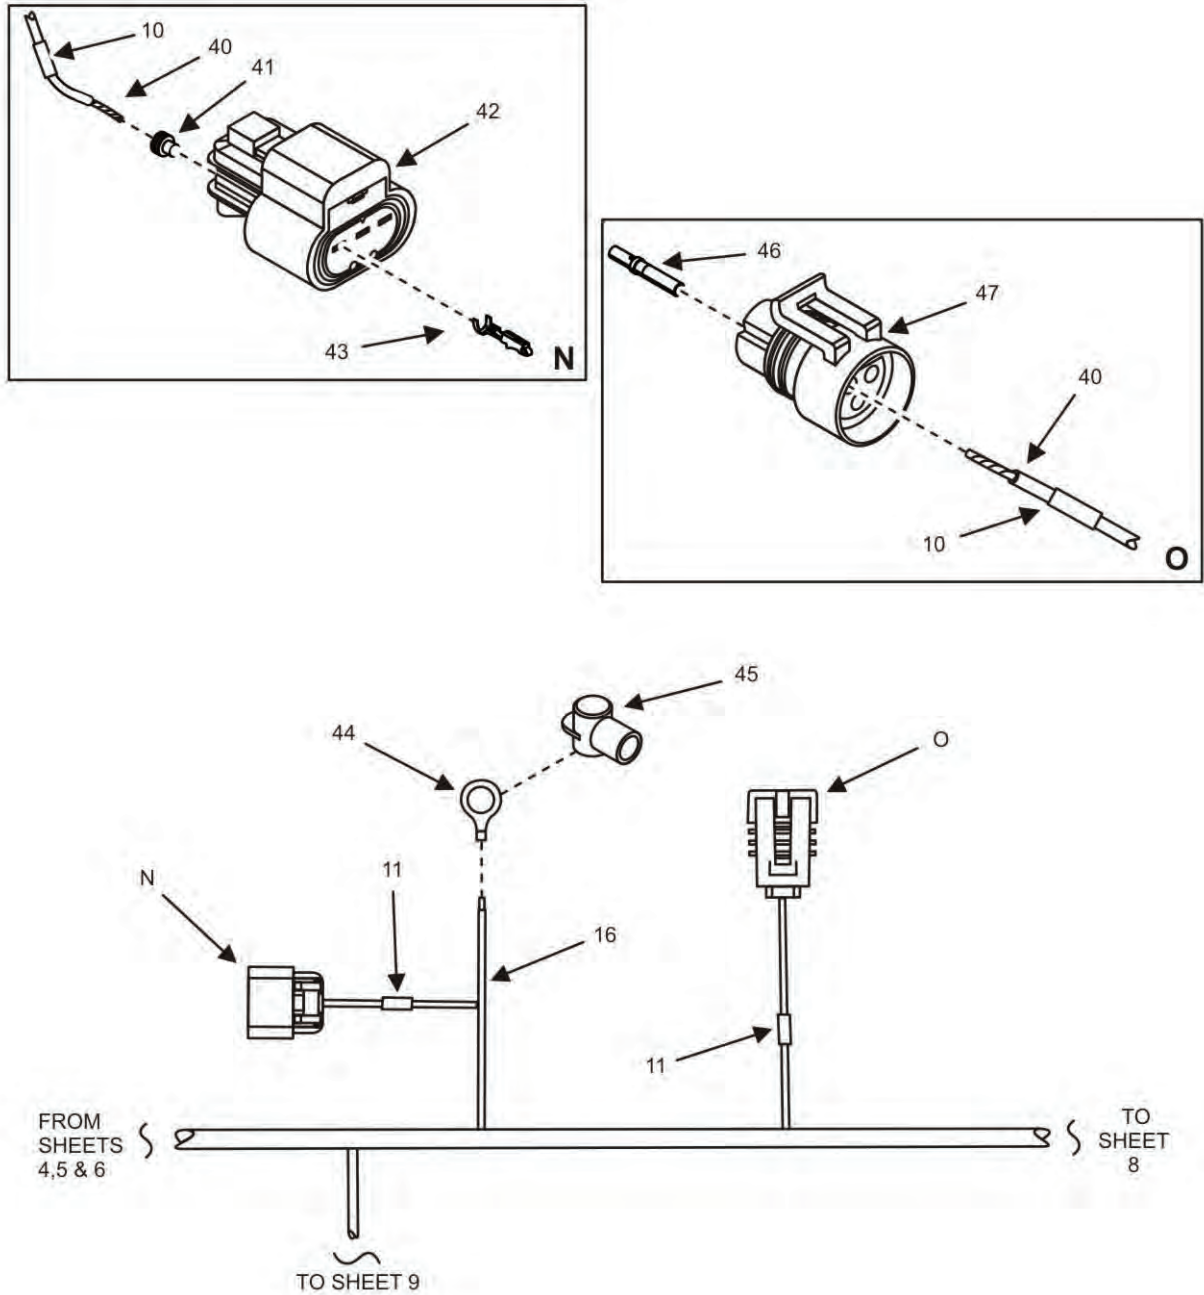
Engine Wiring Harness (Sheet 7 of 13).
